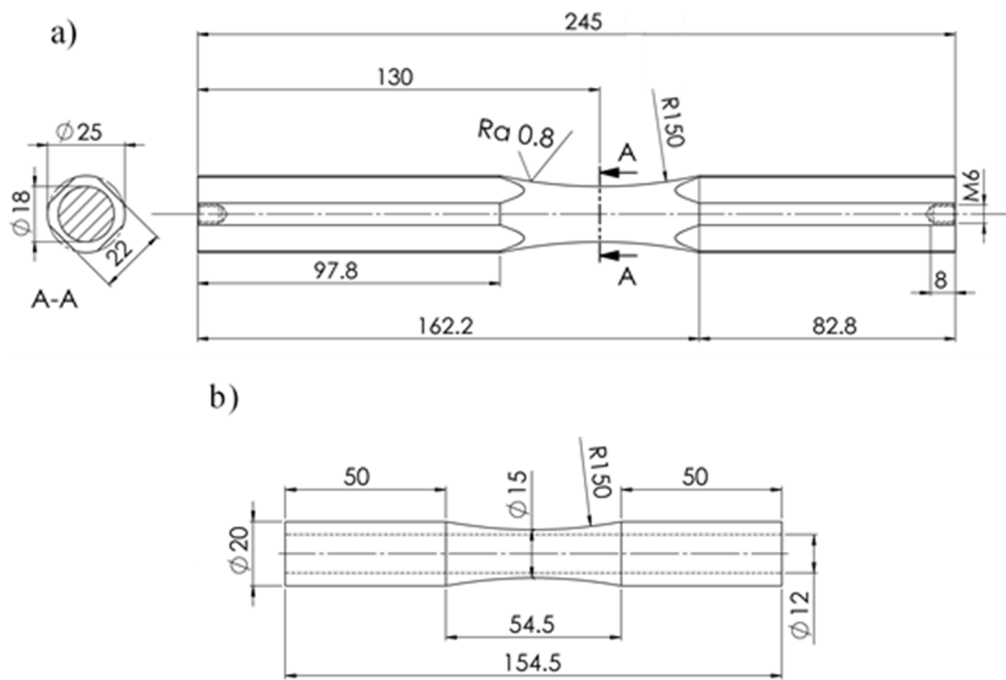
(a) Specimen's geometry for bending-torsional fatigue tests; (b) specimen's geometry for axial-torsional fatigue tests (dimensions are given in mm)
